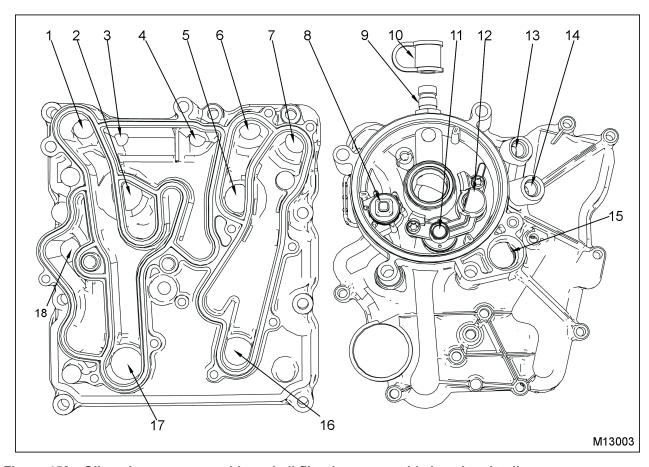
Oil cooler cover assembly and oil filter base assembly location details
